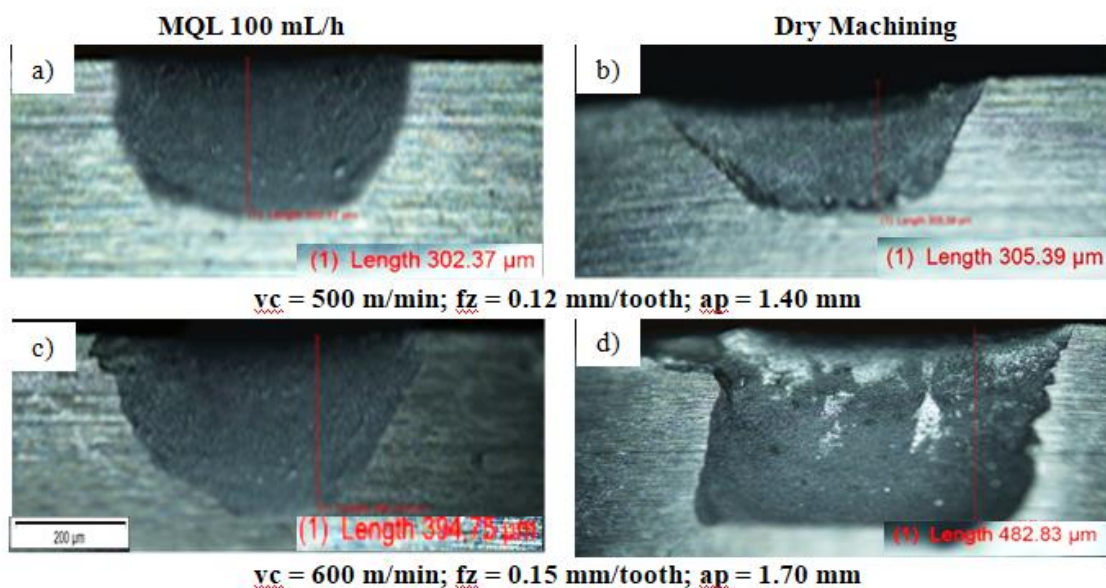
Tool flank wear under MQL 100 mL/h and dry machining
